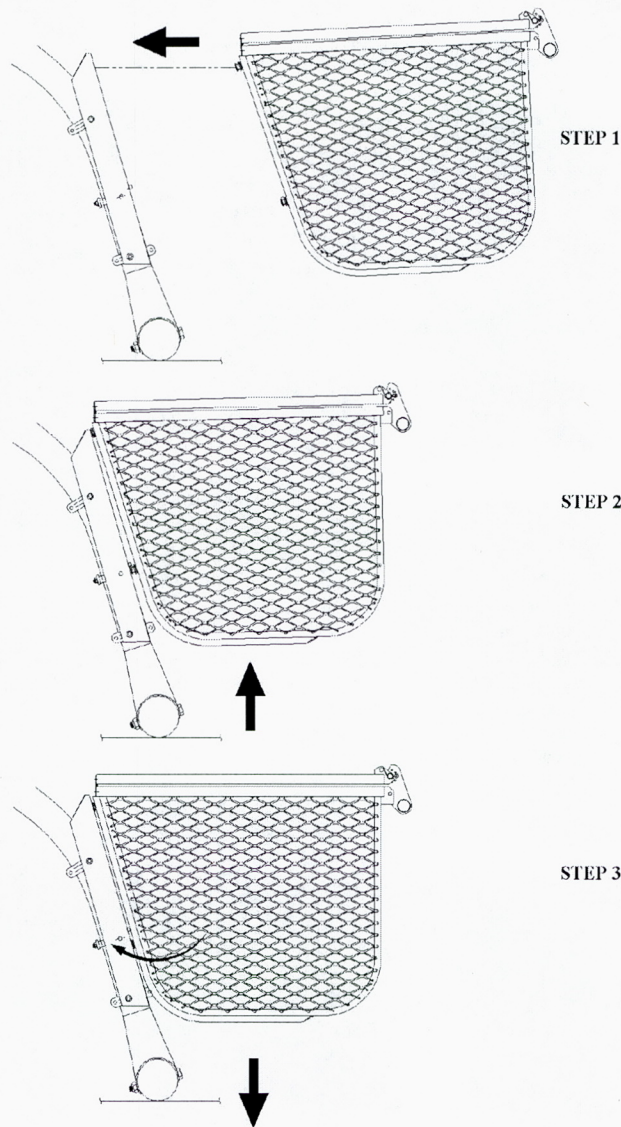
Basket Attachment Steps (Low basket installation shown. Installation instructions typical for low and high basket installation).
